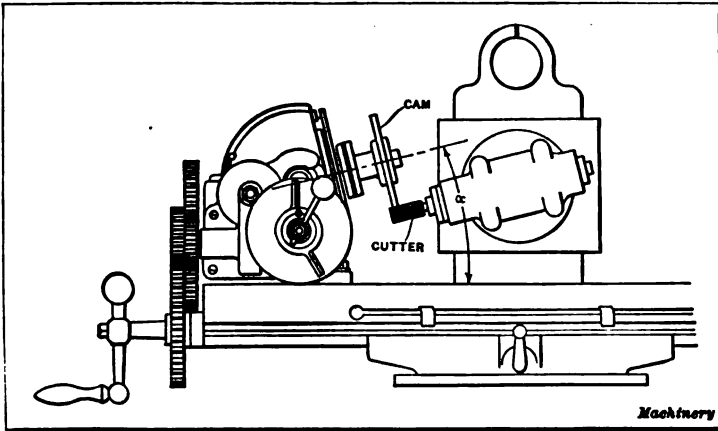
Milling a Plate Cam by use of Spiral Head and Vertical Milling Attachment
